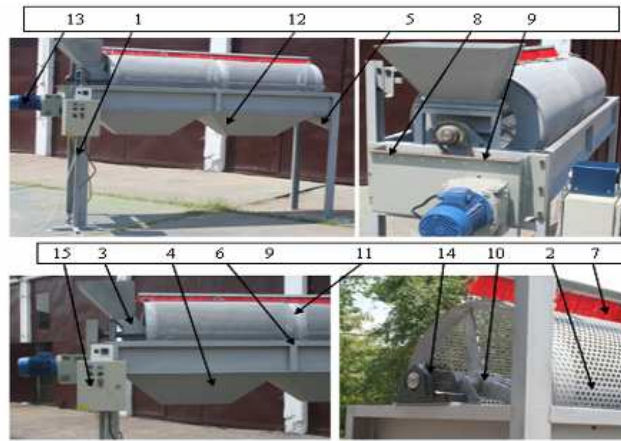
Dimensional sorting equipment / *Sortator dimensional SD 2630
